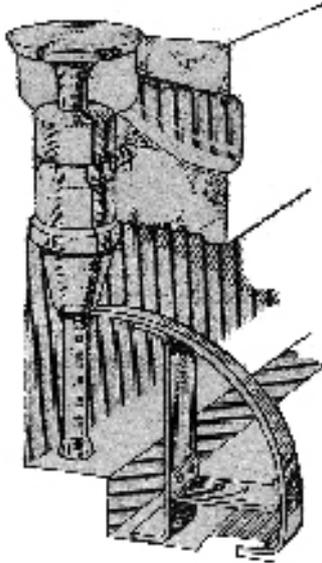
'An inexpensive valve guide support which enables the existing valve guides to be used when grinding in.'
